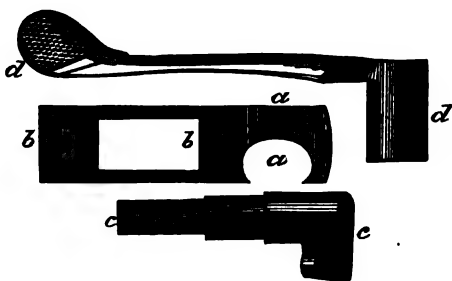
FLAN OF PURDEY BOLT (reduced one-third; a a slot for cam c; b b wearing surfaces; d d top lever).
